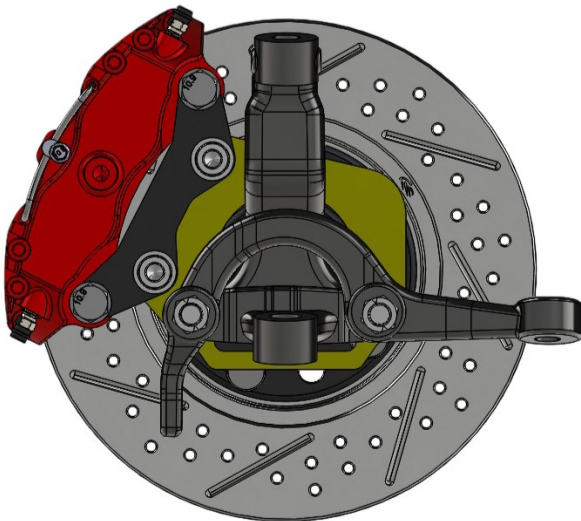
Caliper assembly installed inboard view (left driver side shown)
